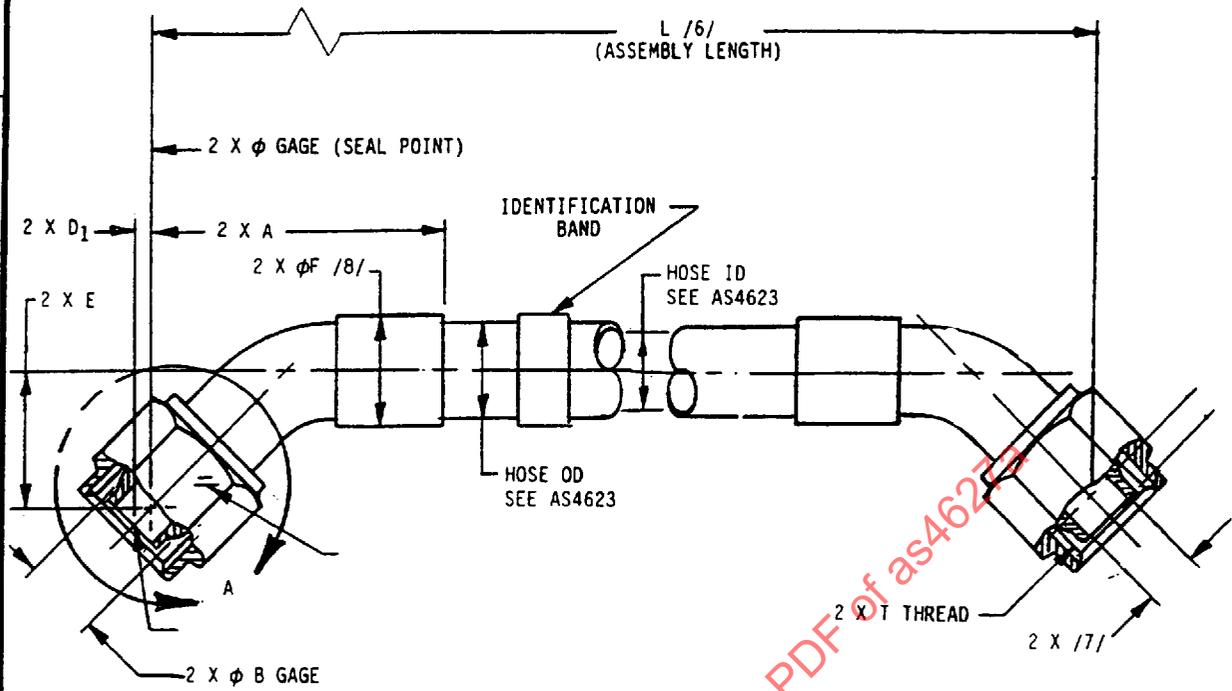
HOSE ASSEMBLY, 90° ELBOW TO 90° ELBOW
